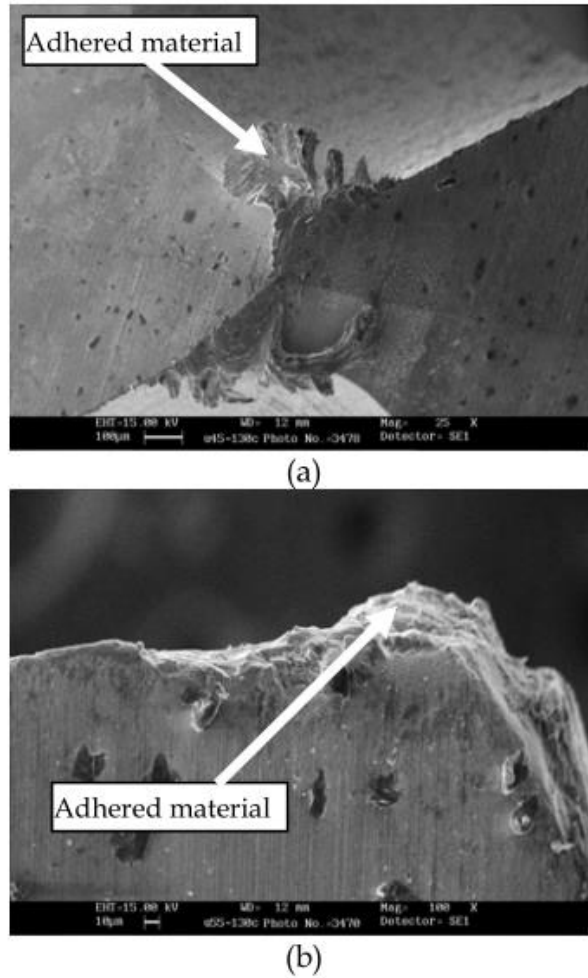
Adhered workpiece materials at the (a) chisel edge and (b) the cutting edge of after drilling Ti-6Al-4V [23].
